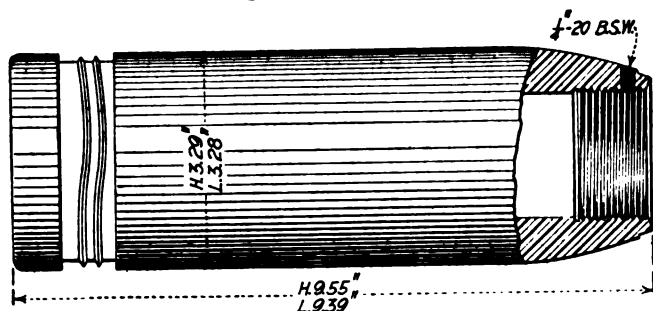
BRITISH 18-LB. HIGH-EXPLOSIVE SHELL
